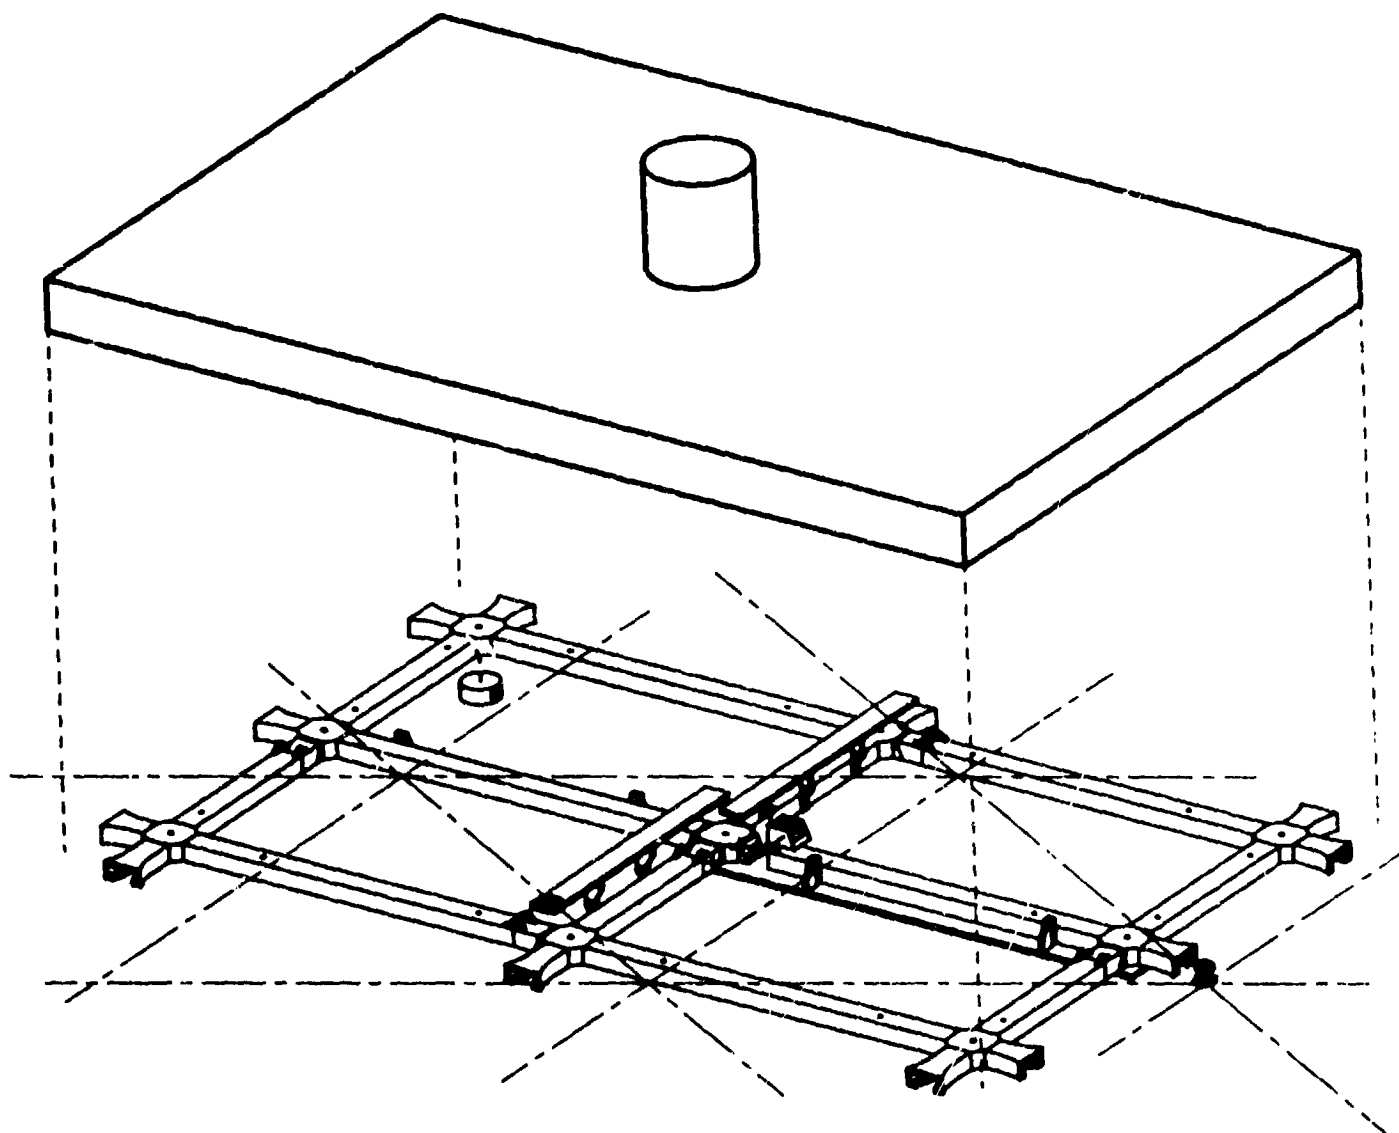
PARTIAL EXPLODED VIEW OF MRMS.
